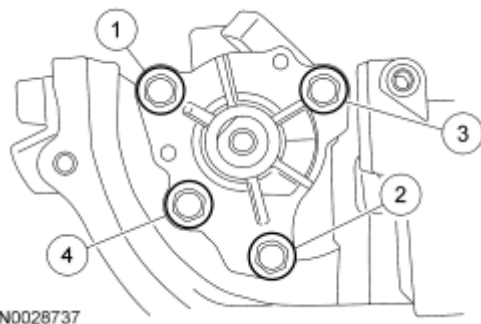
Identifying Tightening Sequence Of Oil Pump Assembly Bolts
